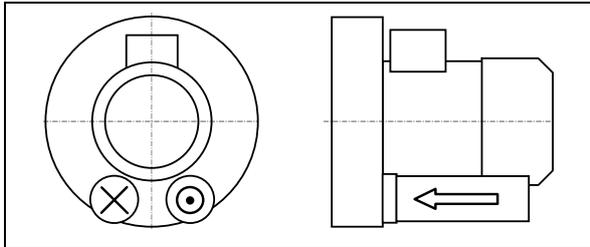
2BH1... (single-impeller pump-motor units), 2BH9 23
